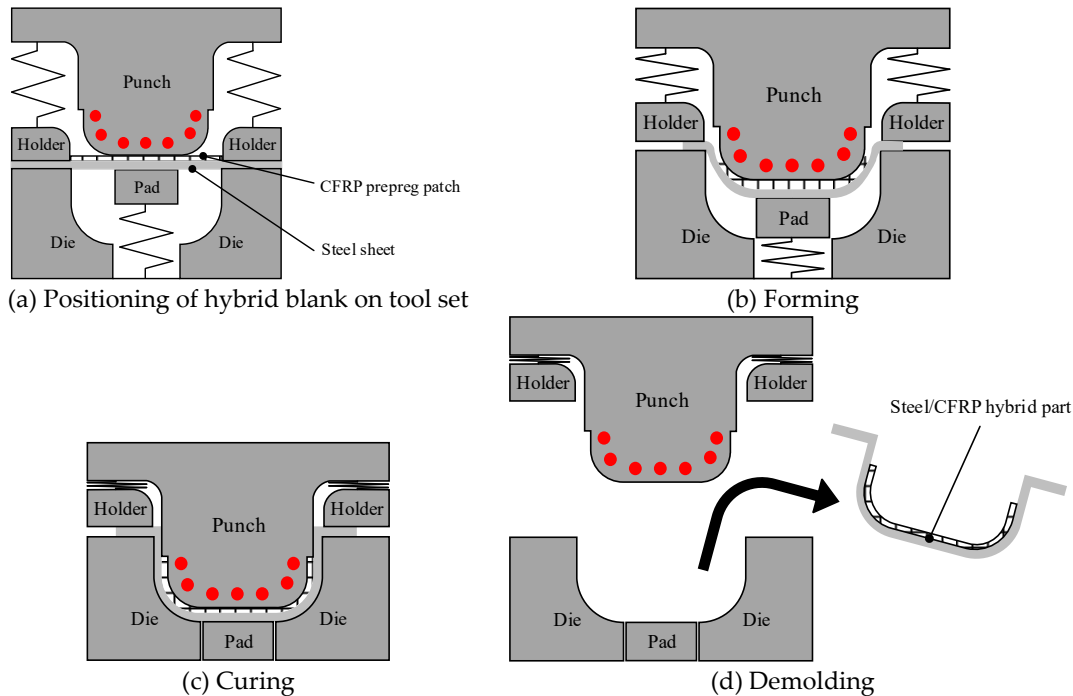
Manufacturing process of the steel/CFRP hybrid part [17].
